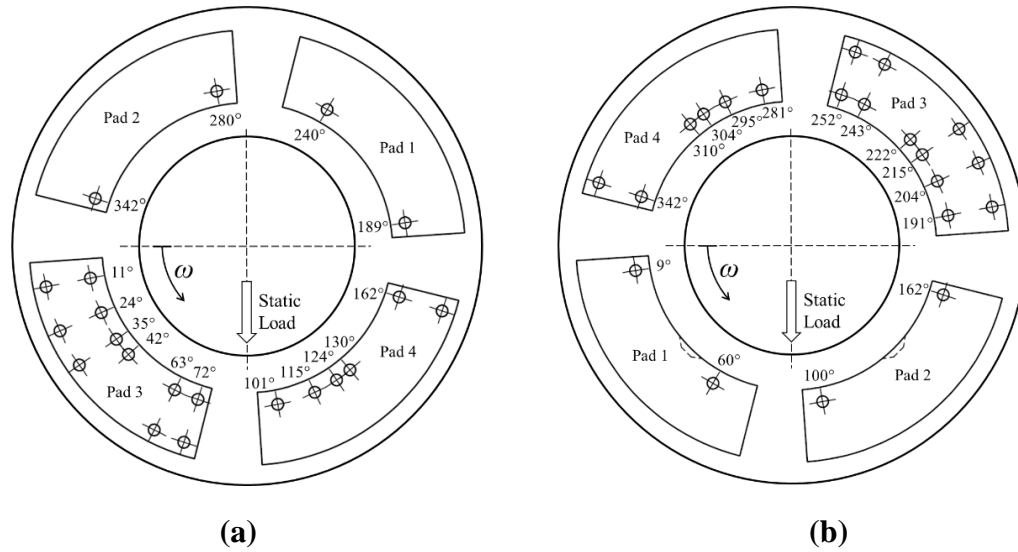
DE view of thermocouple locations and pad orientation for (a) original bearing (b) modified bearing
